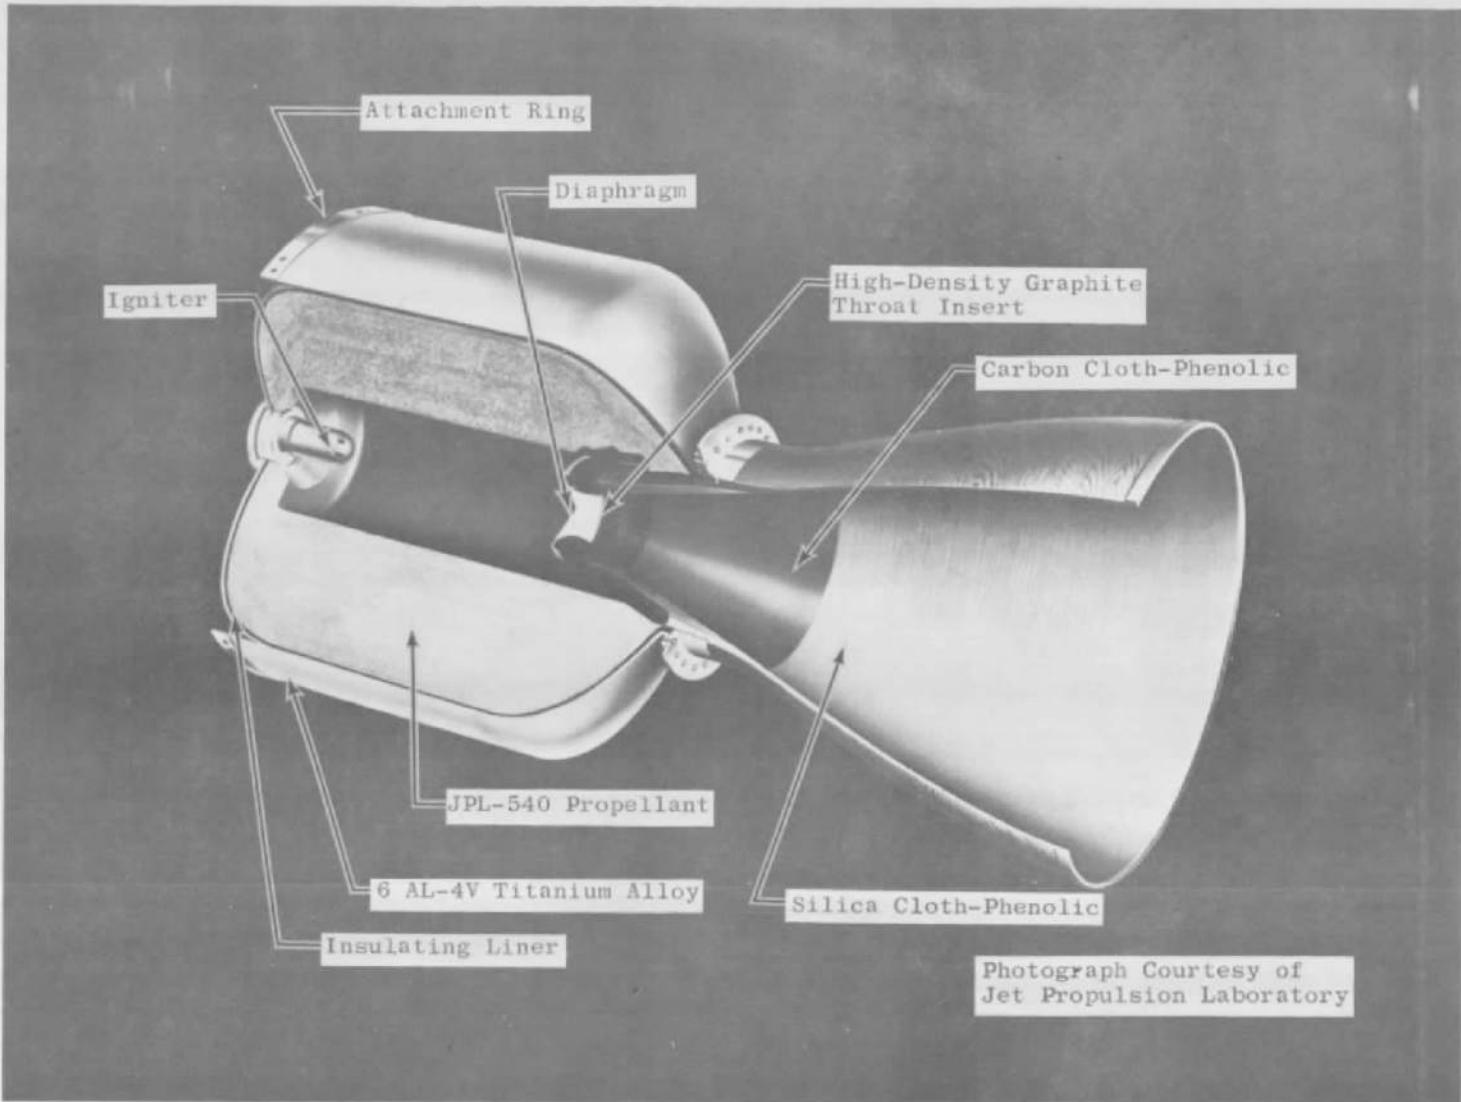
JPL-SR-28-3 Solid-Propellant Rocket Motor Assembly
